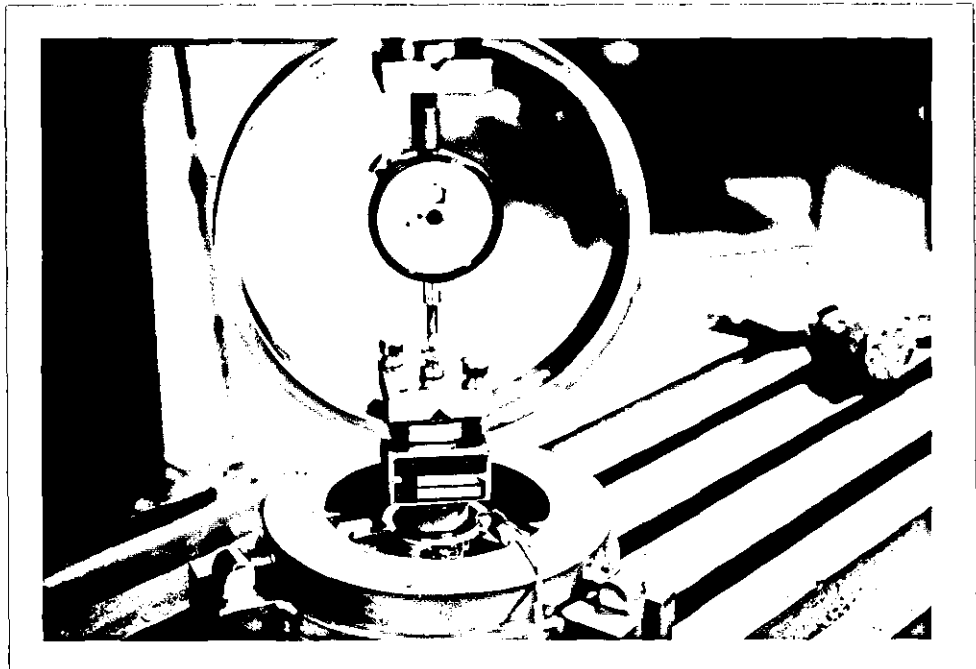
RING IN CALIBRATION FIXTURE
